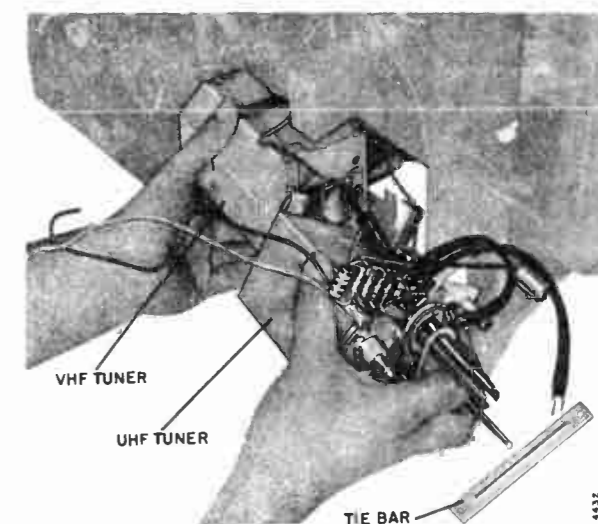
Bottom View of TV Chassis Showing Removal of UHF Tuner.
